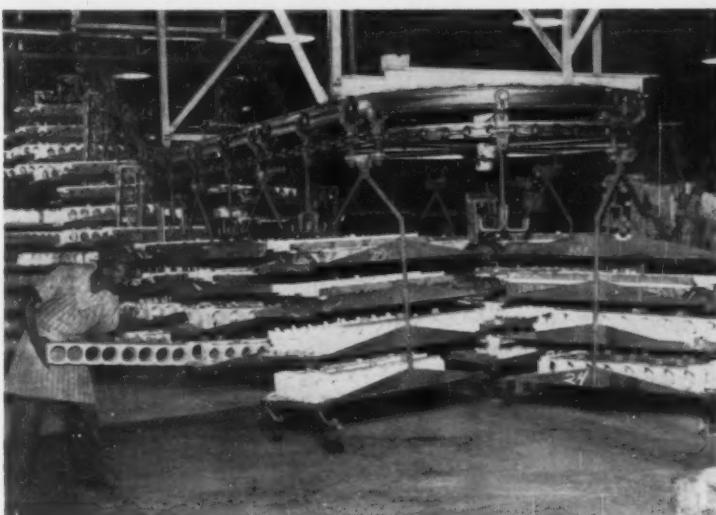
Loading cores and core assemblies onto the chain conveyer carriers that transfer them to the molding lines.
